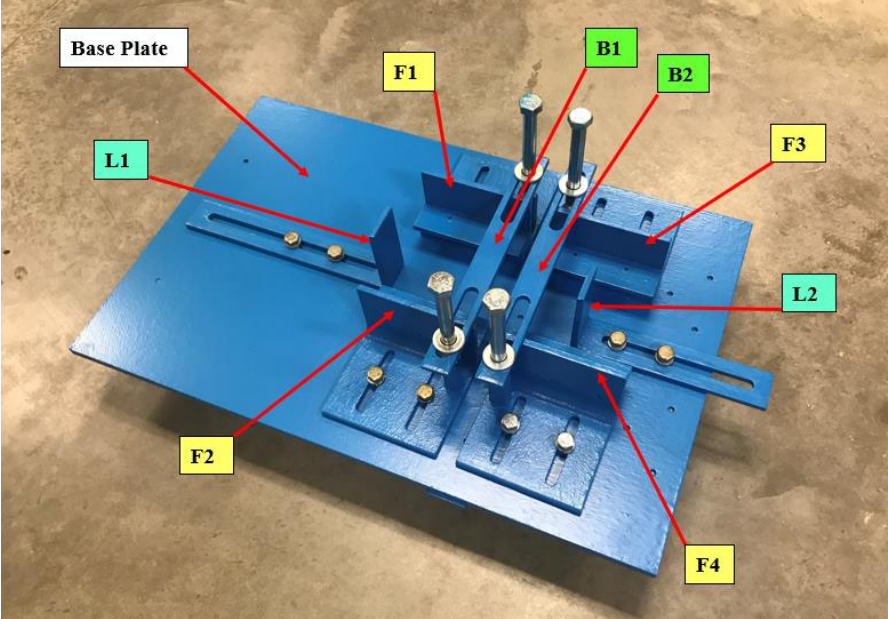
Sample Holder of cutting Rectangular Specimens
